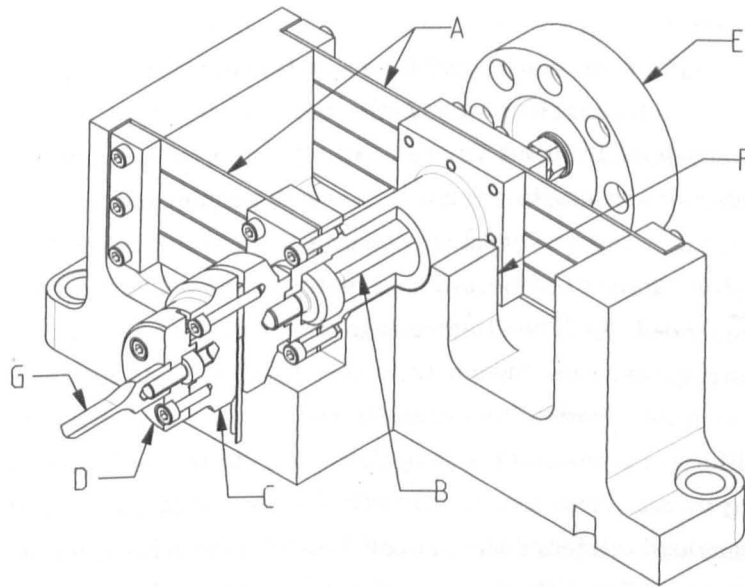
Detail view of the linear guide assembly showing: (A) flexible vanes, (B) stinger, (C) load cell, (D) alignment coupling, (E) flange coupling to the EMV, (F) hard stop, (G) drive linkage.
